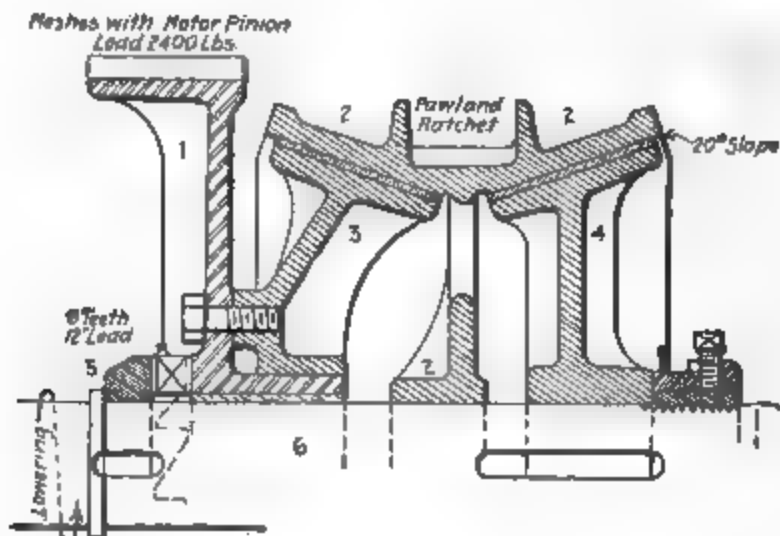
Cone Brake for Gantry Crane Full Load Torque = 30,400 In-Lbs.
